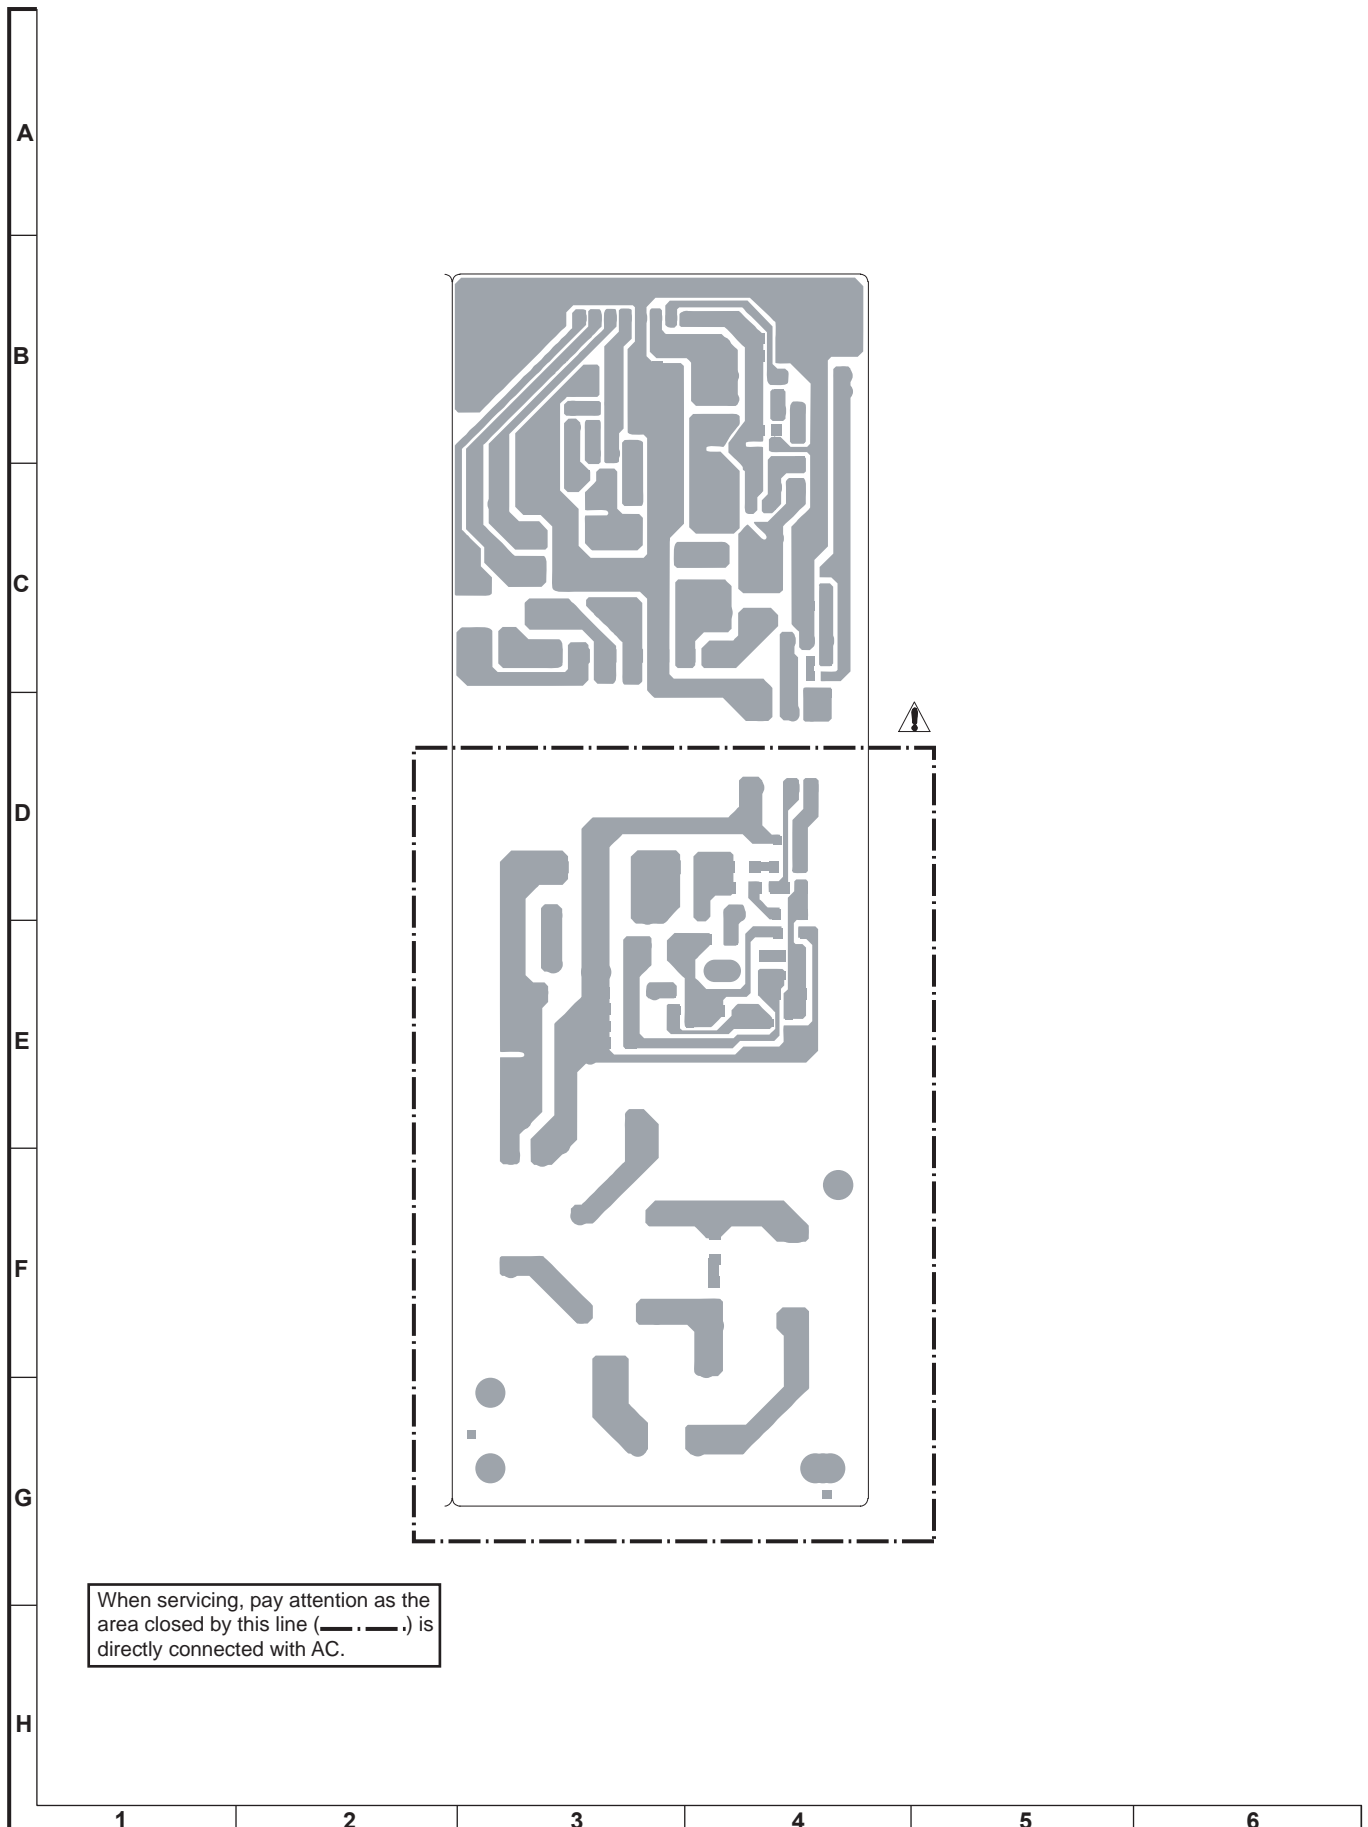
WIRING SIDE OF POWER PCB (BOTTOM VIEW)
